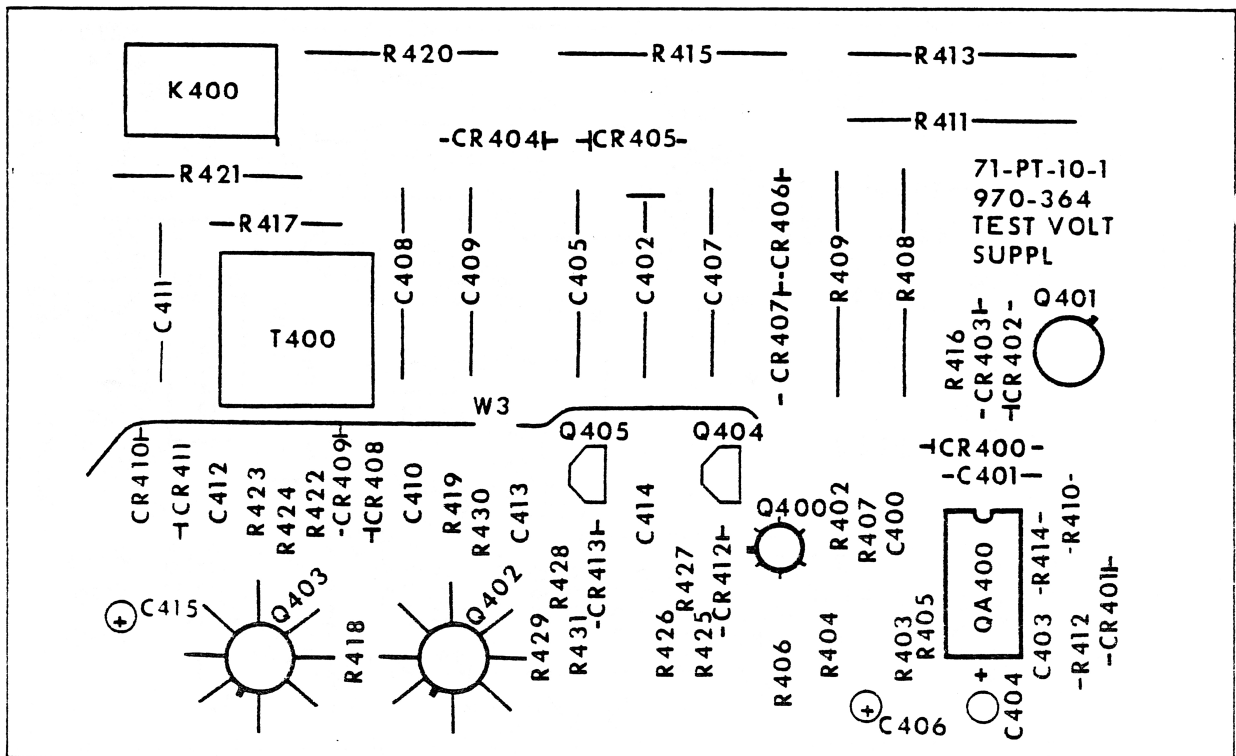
J2 Test Voltage Supply Printed-circuit Board, code 900-373.
